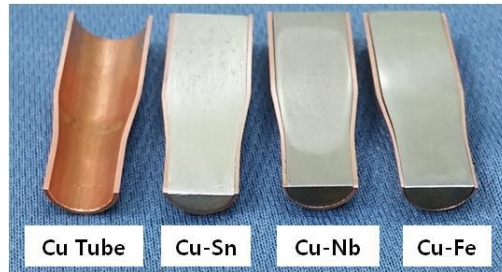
Sectional view of Cu clad bar and tube after swaging experiments
